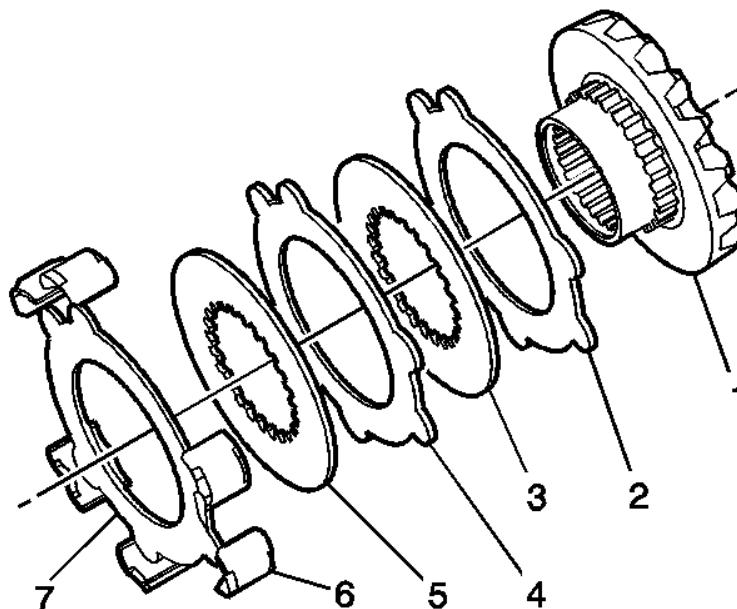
Locking Differential Clutch Disc Assembly (10.5 Inch Axle)
